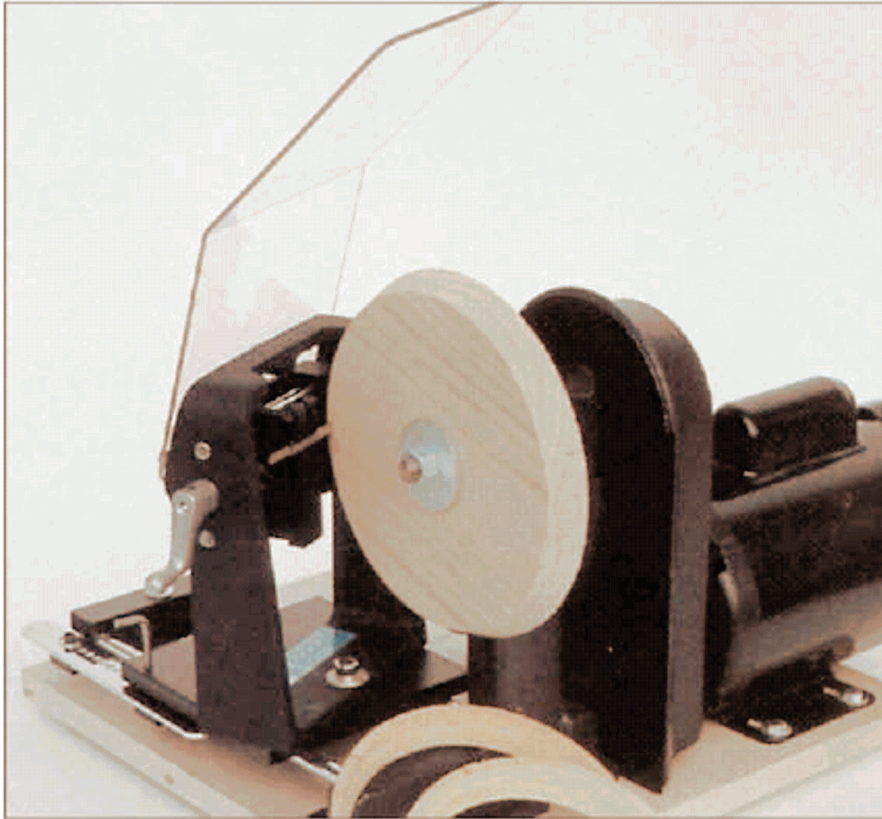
Ring Master® is a hobbyist tool that cuts rings that are glued together to make vessels.
